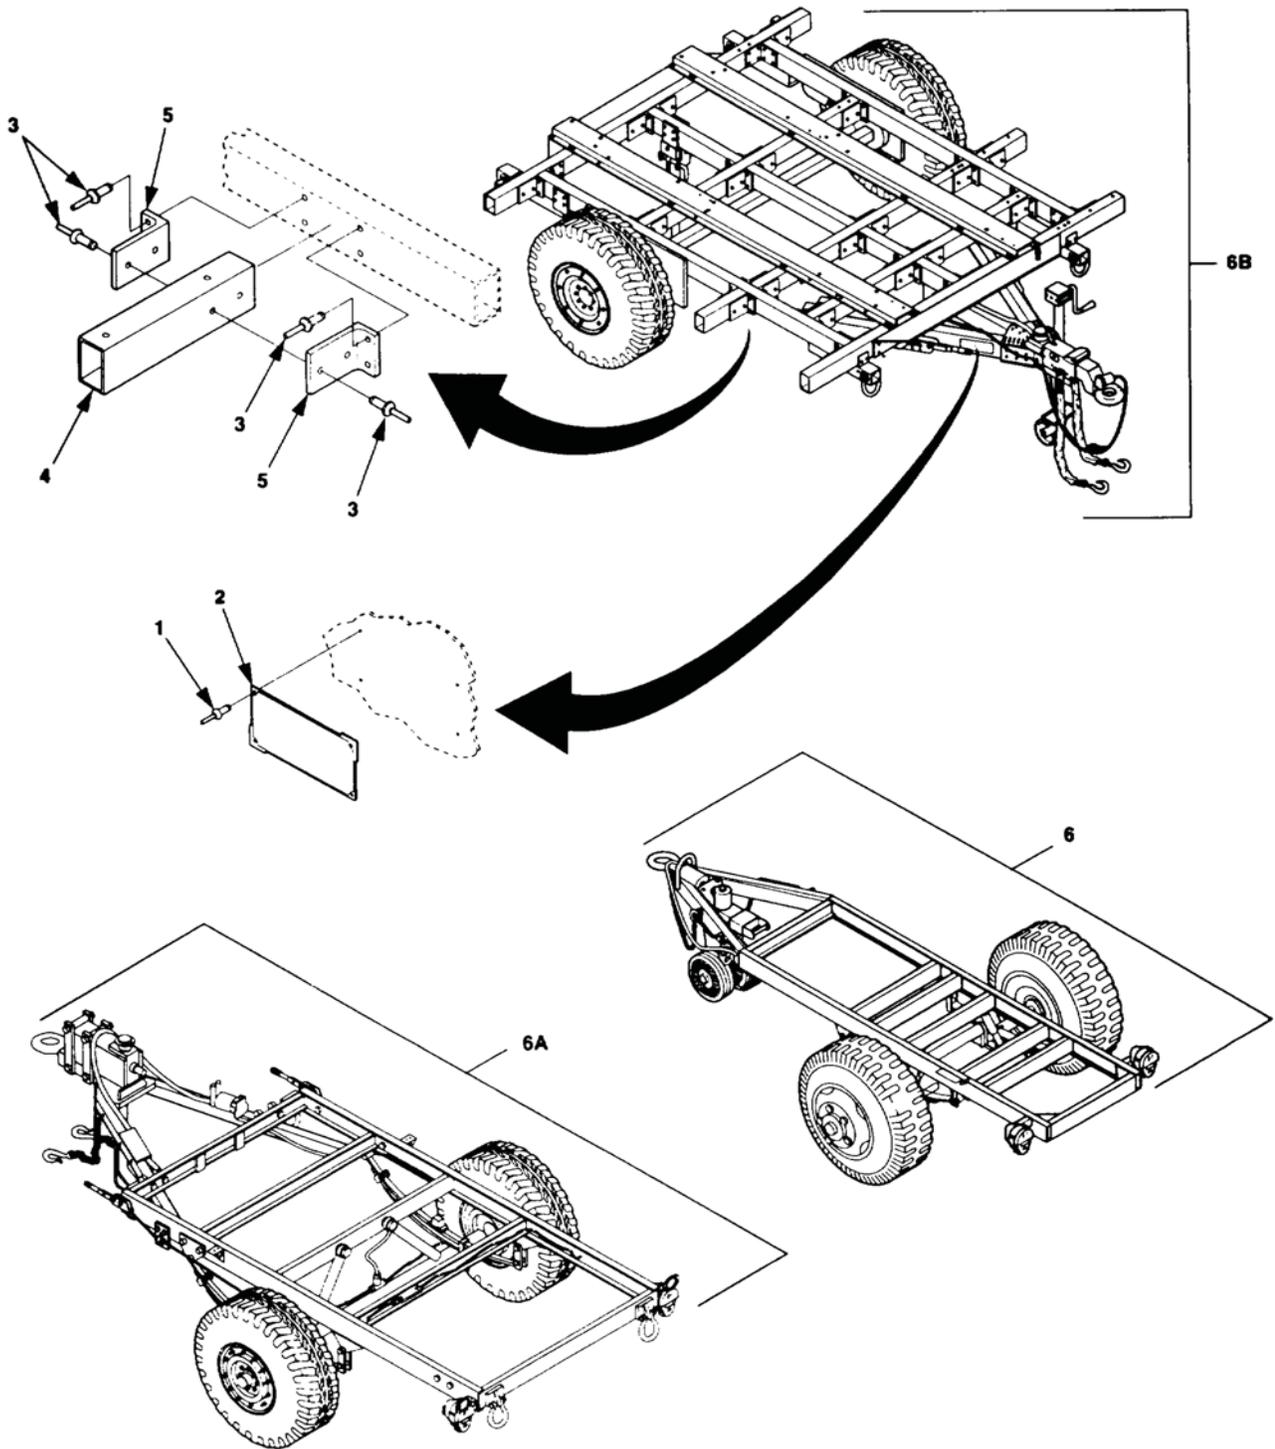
Power Plant/Power Unit Trailer Chassis Assembly.
